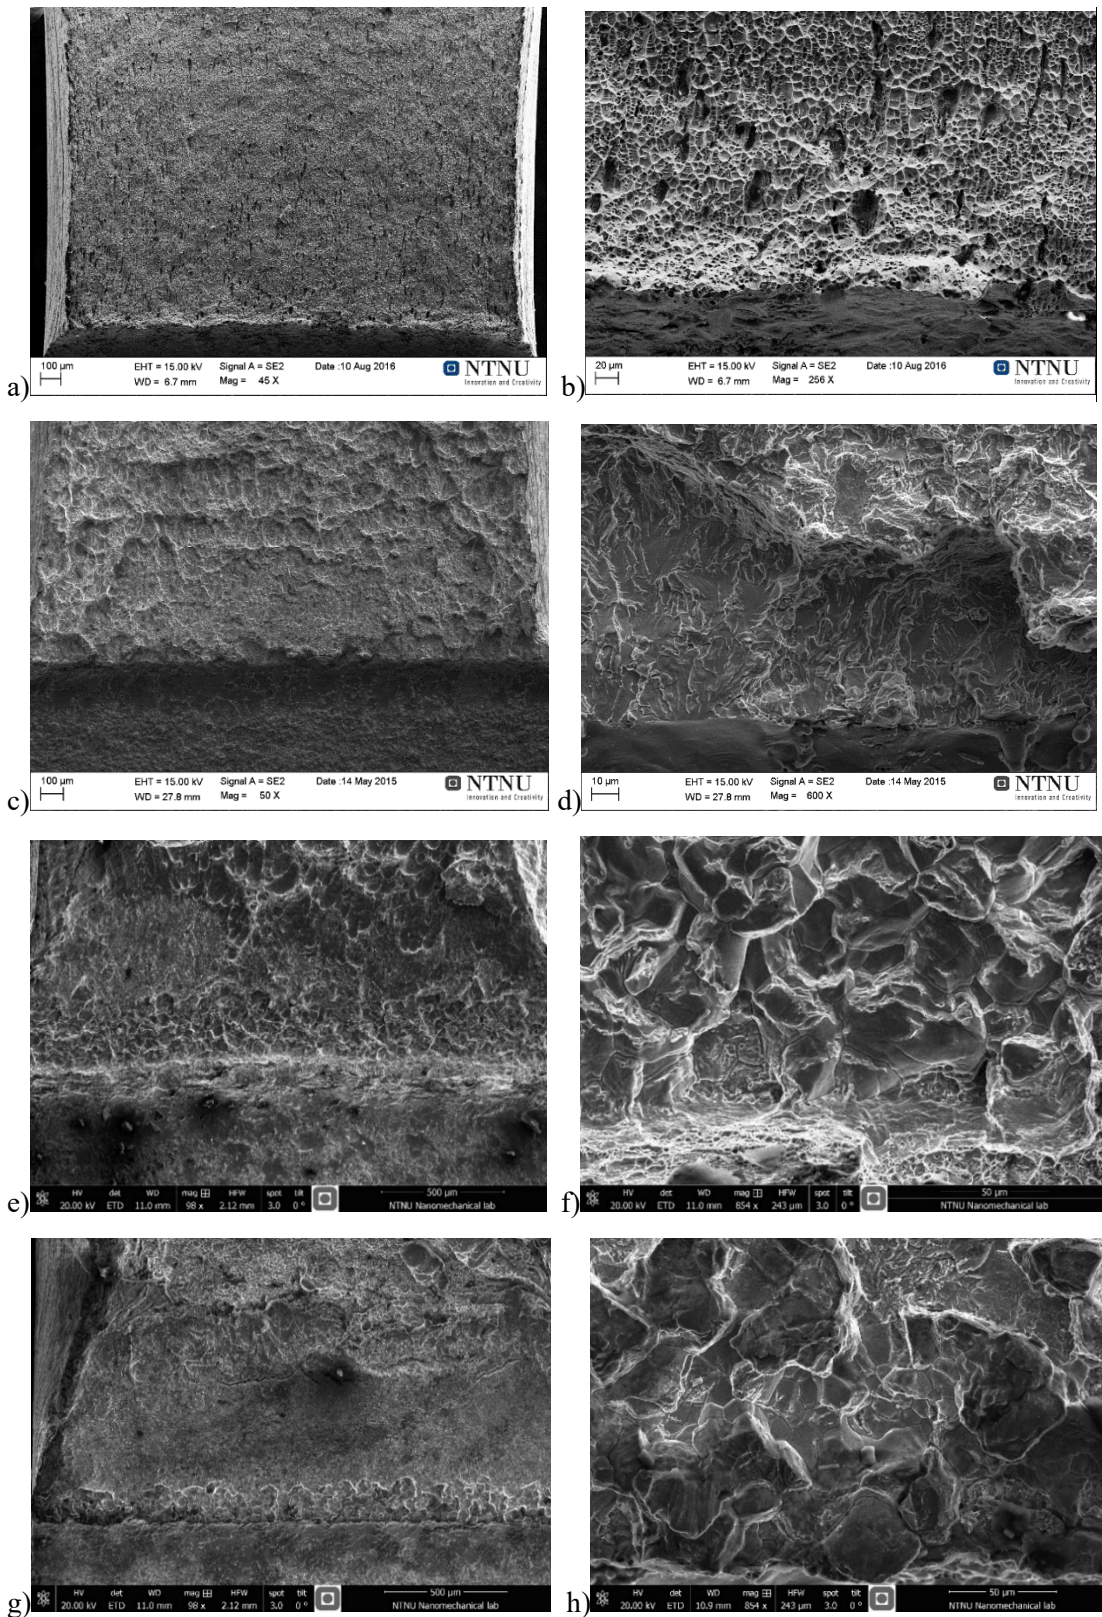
Fracture surfaces of CT specimens from welded pipes after testing a-b) Pipe A specimens tested in air c-d) Not welded Pipe B specimens tested in CP e-f) Welded Pipe B specimens tested in air g-h) Welded Pipe B specimens tested in CP
